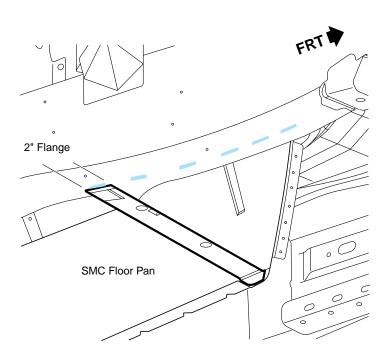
Remove Majority of Lower Extension Panel to Access the Rail
